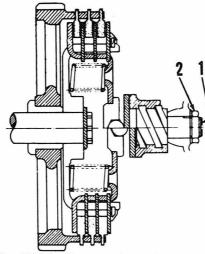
Cross sectional view of 7D and 7S manual clutch assembly. Top half shows clutch disengaged. Adjusting screw is shown at 1 and locknut at 2.
